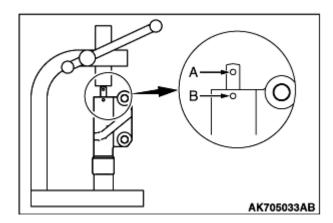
Setting Auto Tensioner To Longitudinal Type Courtesy of MITSUBISHI MOTOR SALES OF AMERICA.
